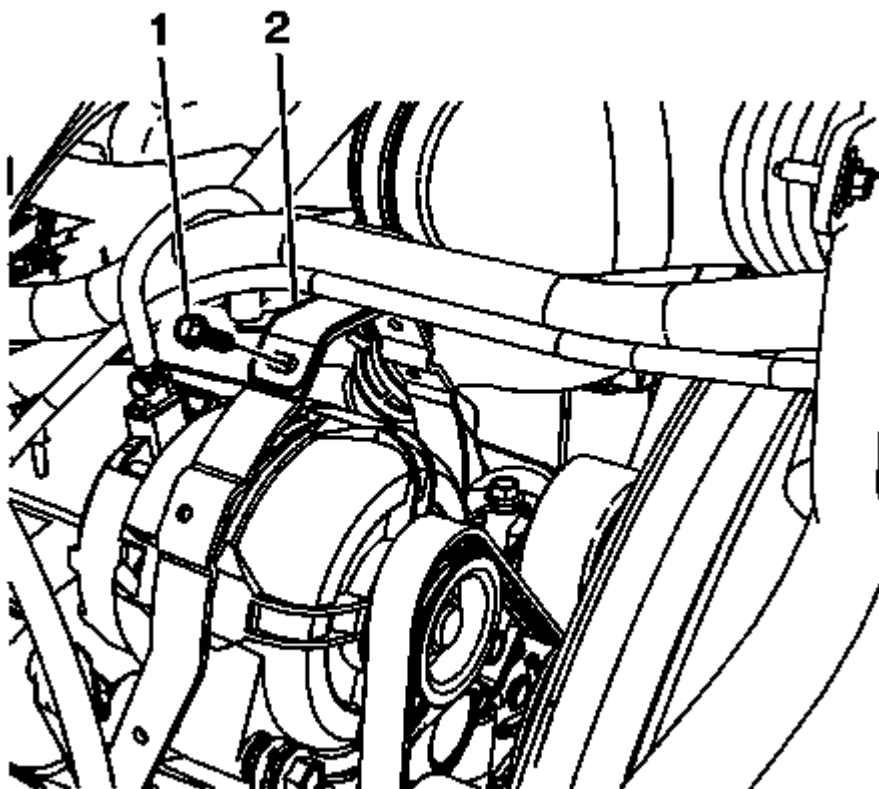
Identifying Oil Level Indicator Tube Bolt & Bracket
